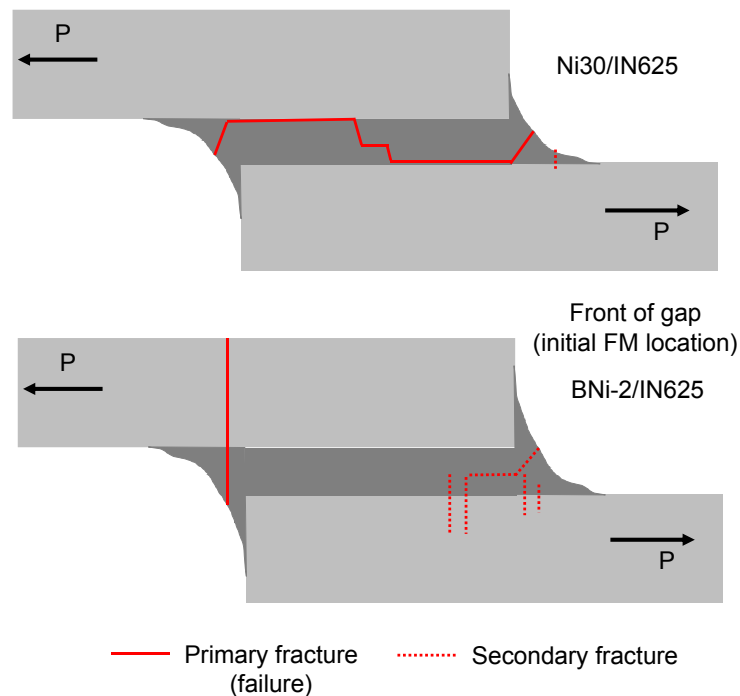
Summary of failure location found in Ni30/IN625, and BNi-2/IN625 brazed single lap shear joints.
